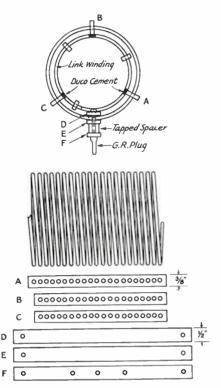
COLL ASSEMBLY FOR WIRE OR COPPER TUBING COILS
